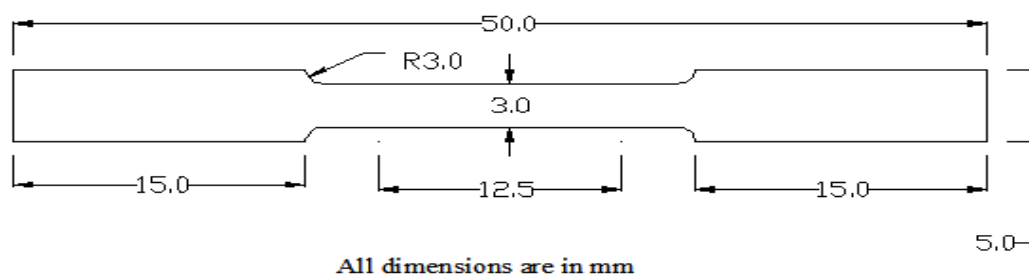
Tensile test specimen as per ASTM E8 standard.
